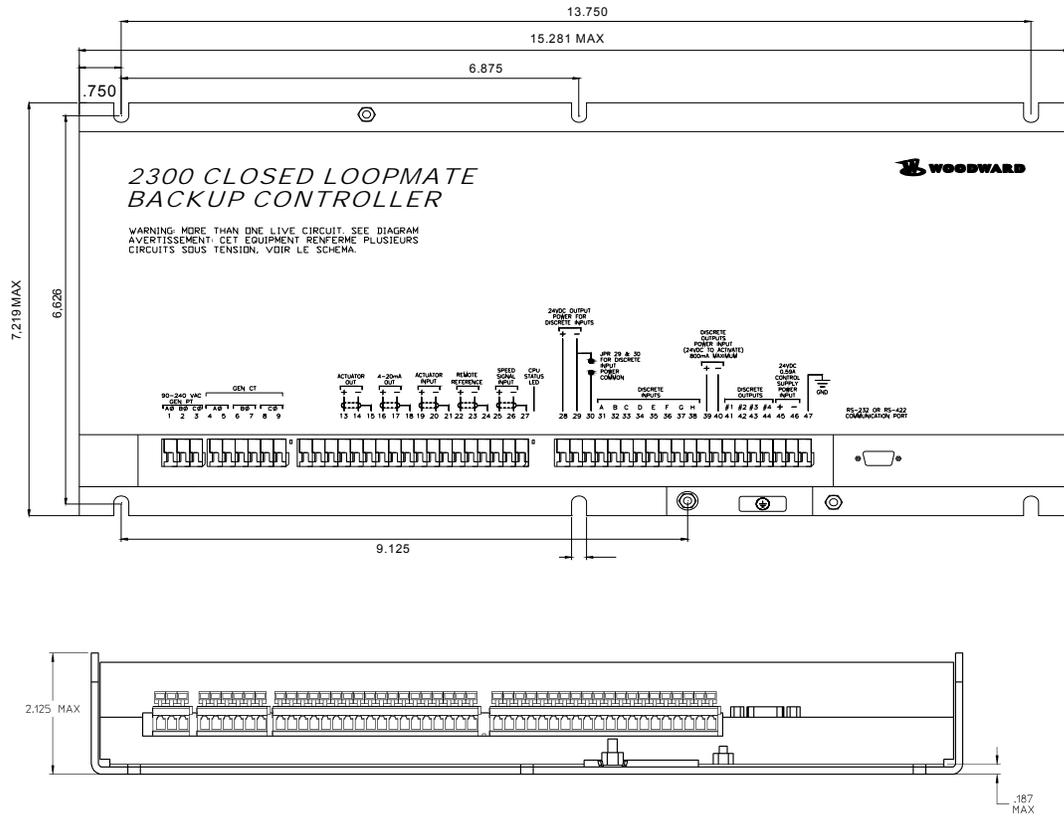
2300 CLM Outline Drawing (8237-1132)
